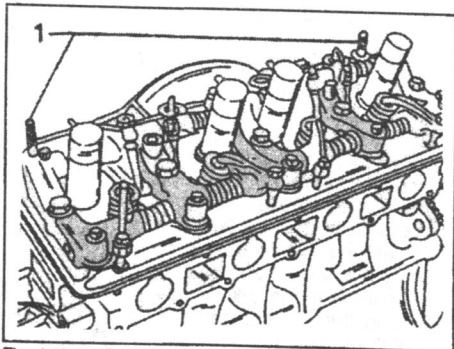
Cylinder head and rocker shaft assembly fitted to the engine. The two locating pins are fitted to positions (1).
